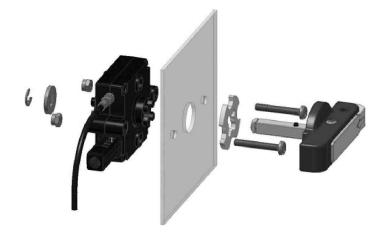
CBkit_Interlock_4 mounting on the Switchgear door
